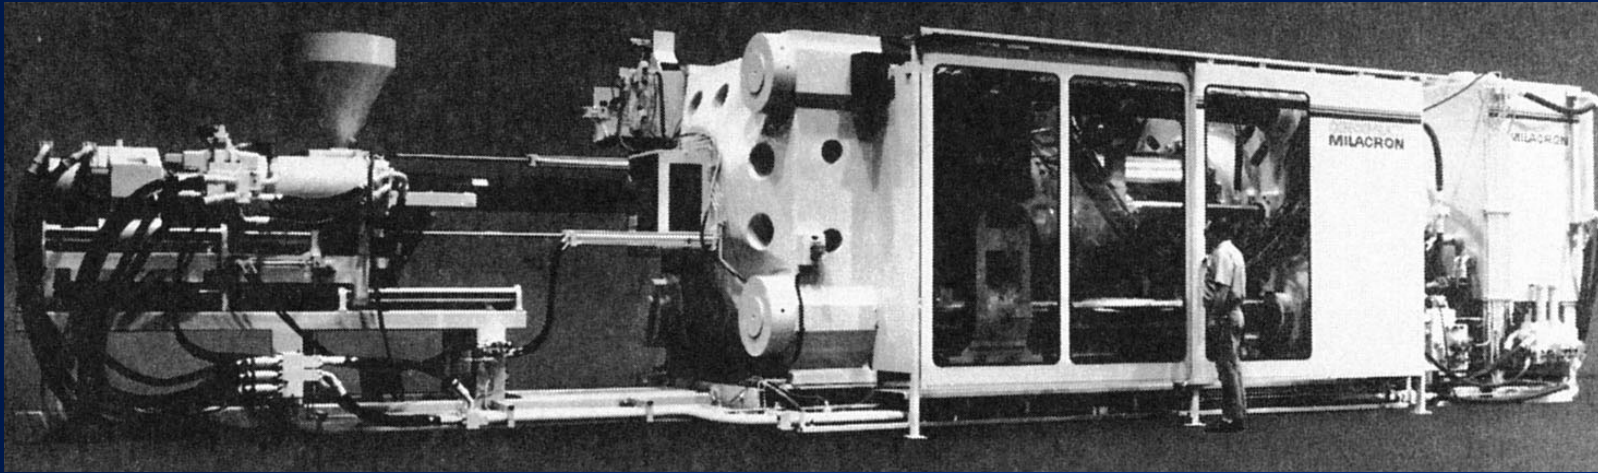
A large (3000 ton capacity) injection molding machine
